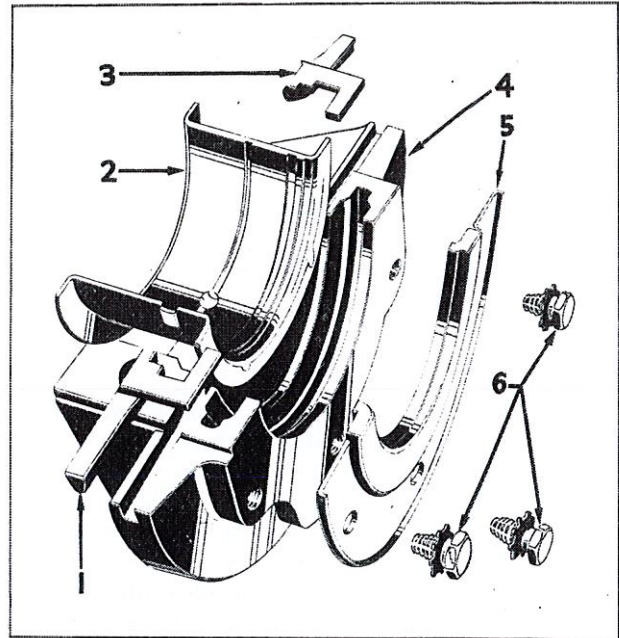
Crankshaft Rear Bearing Cap Oil Seals
